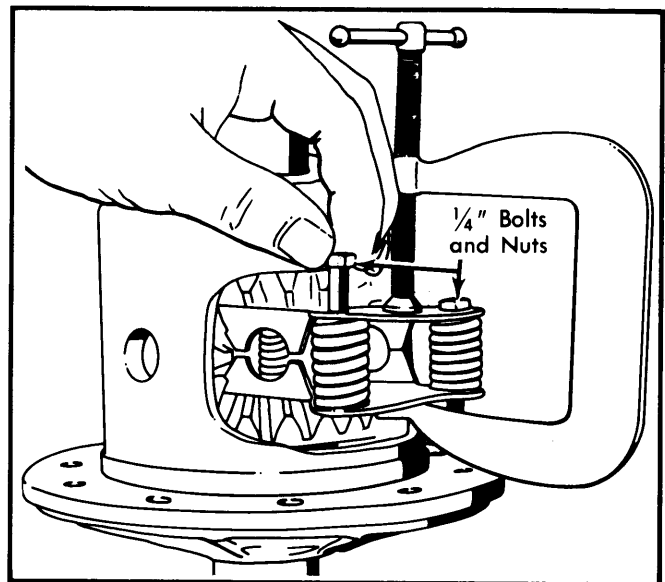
Removing Preload Spring Pack (Coil Type Preload Spring)
